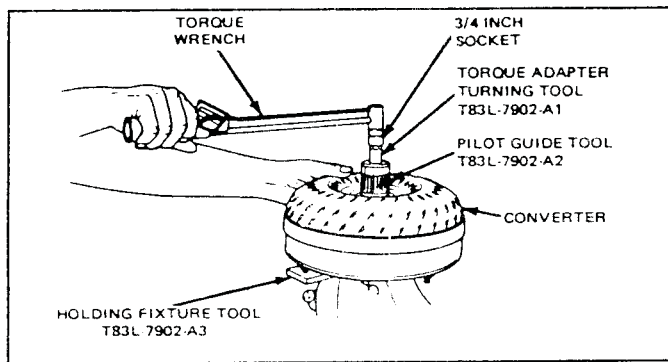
Converter Damper/Hub Weld Check—AOD
